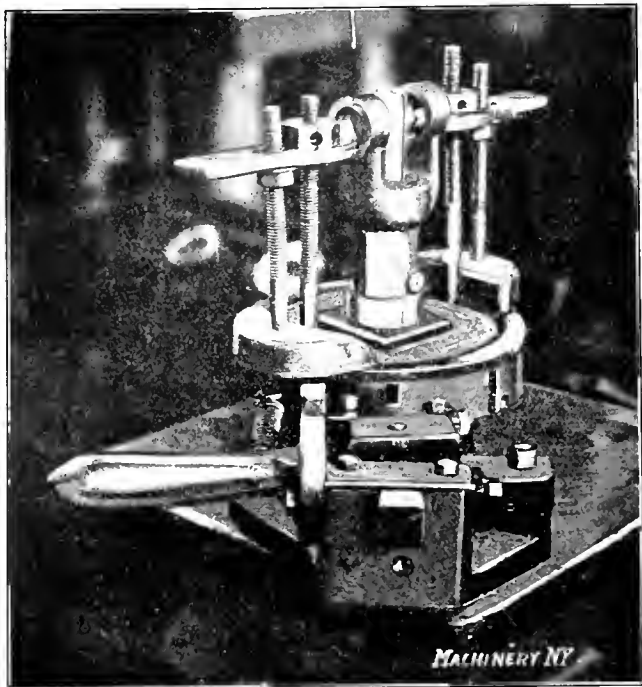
Indexing Fixture used on Keyseating Machine while Squaring Holes
